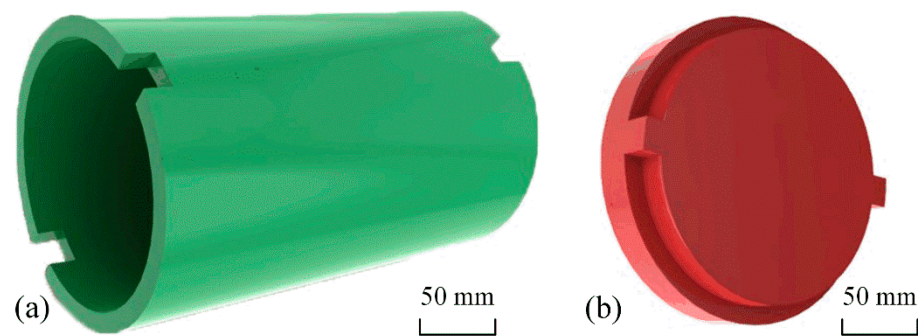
Grinding roller and holder. (a) model of the grinding roller; (b) fixture of the grinding roller.
